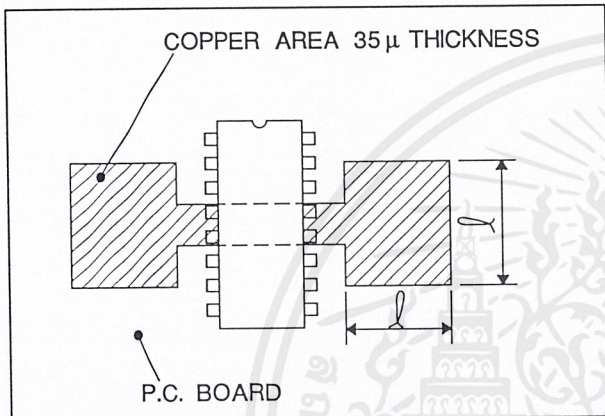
Example of P.C. Board Copper Area which is used as Heatsink
